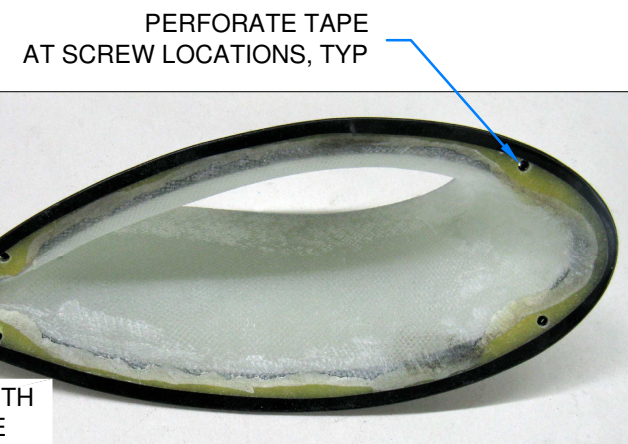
LOWER INTERSECTION FAIRINGS MASKED
